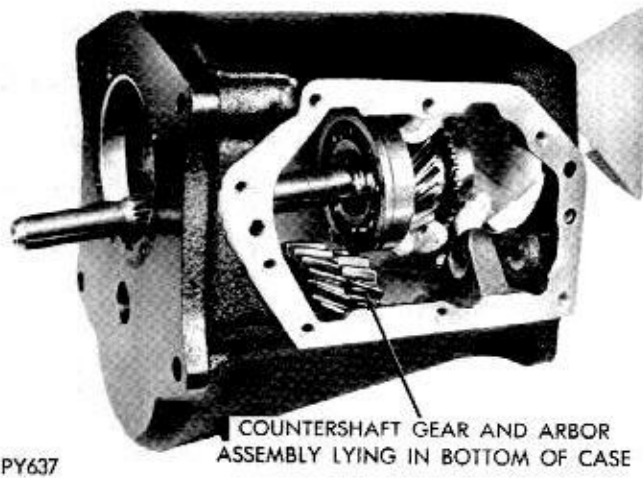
Drive Pinion and Bearing Assembly—Removal or Installation
